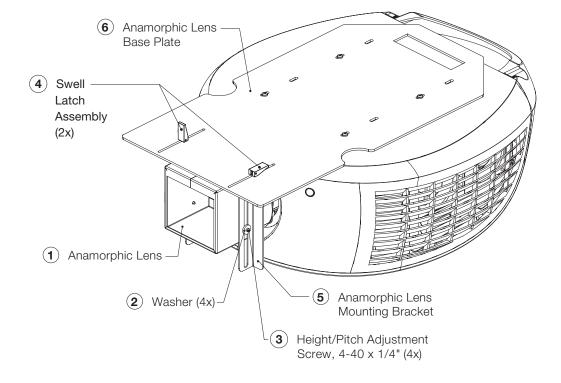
Anamorphic Lens Mounting Assembly - Exploded View
